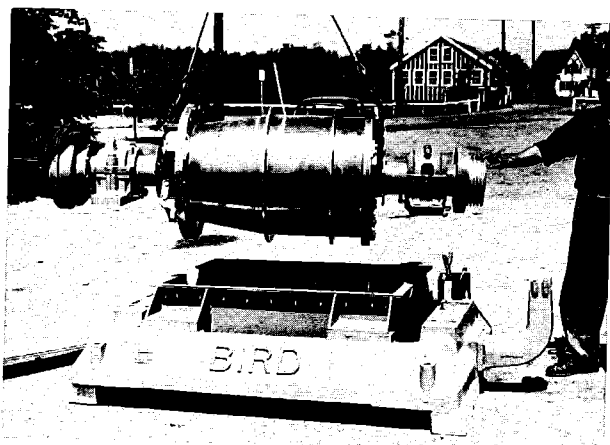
Rotor is kept level and lifted vertically. It is then lowered to floor blocks so that rigging may be readily relocated.
